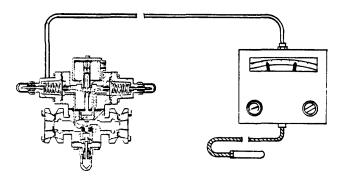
Typical PA Type Back Pressure Regulating Valve
